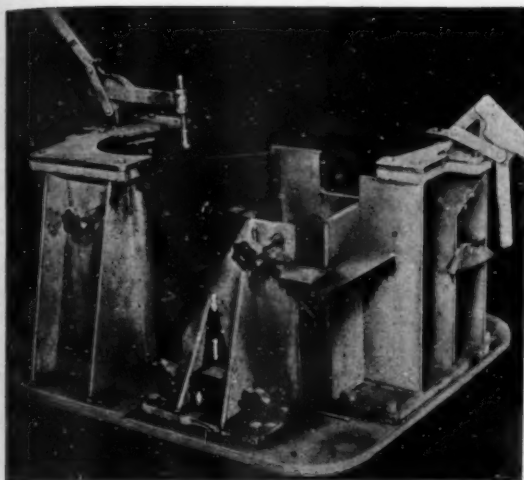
A specially designed fixture for tooling weldments in quantity production.
